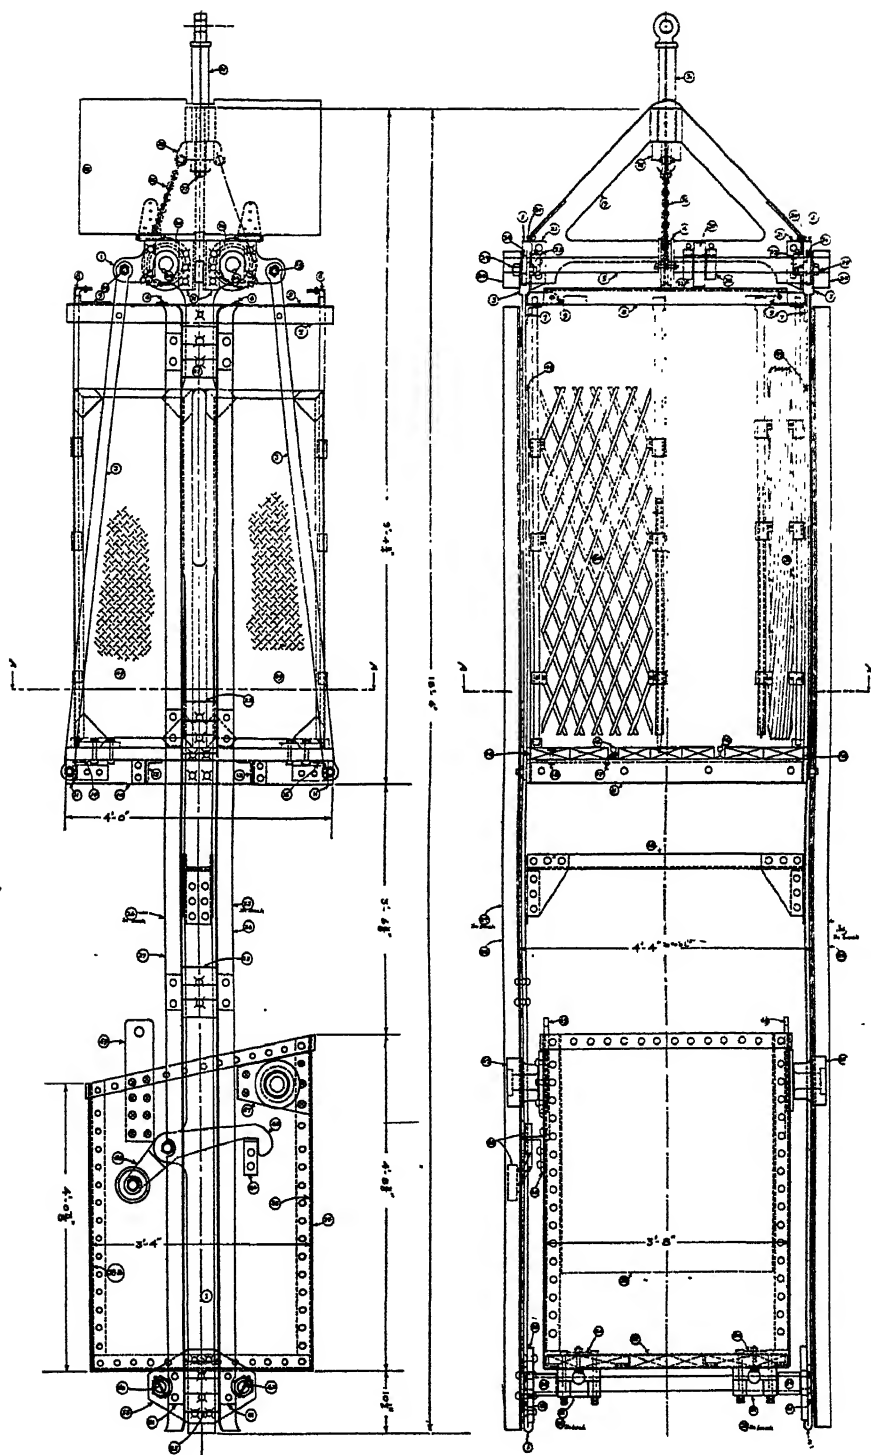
ASSEMBLY OF CAGE AND 2-TON SKIP, BIG JIM MINE. (Continued.)
